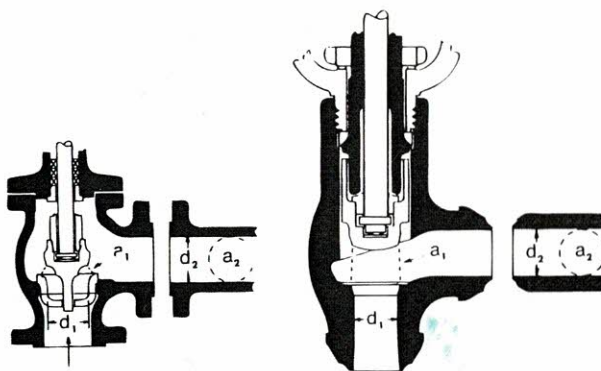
90° angled globe valves. (courtesy of Crane Valve Co.)
